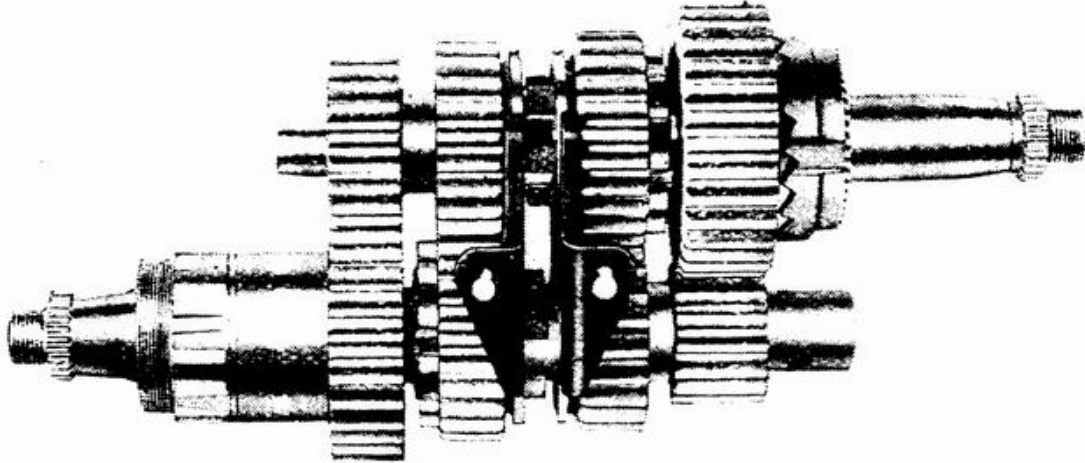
THE GEARS REMOVED FROM THE BCX.
